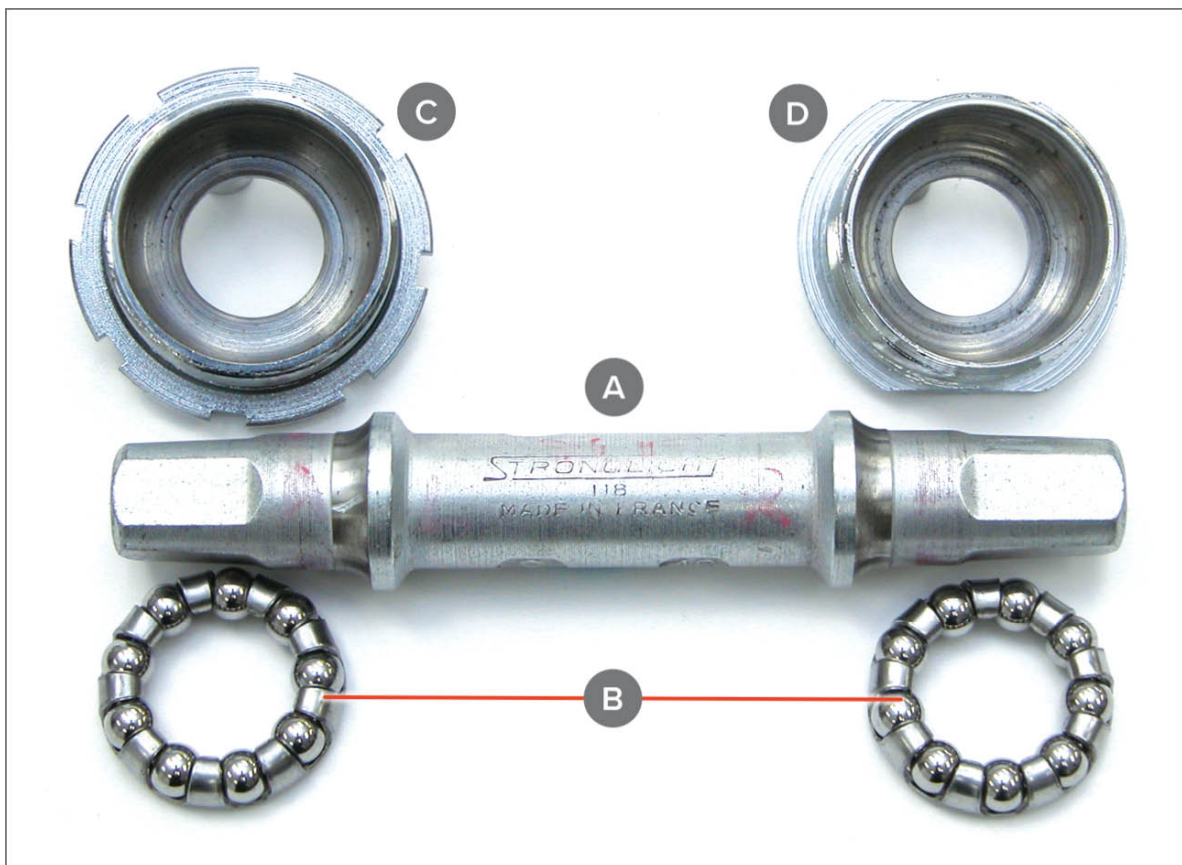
“Cup-and-cone” design of the adjustable bottom bracket: (A) spindle, (B) bearings, (C) left-side cup and lockring, (D) right-side cup
